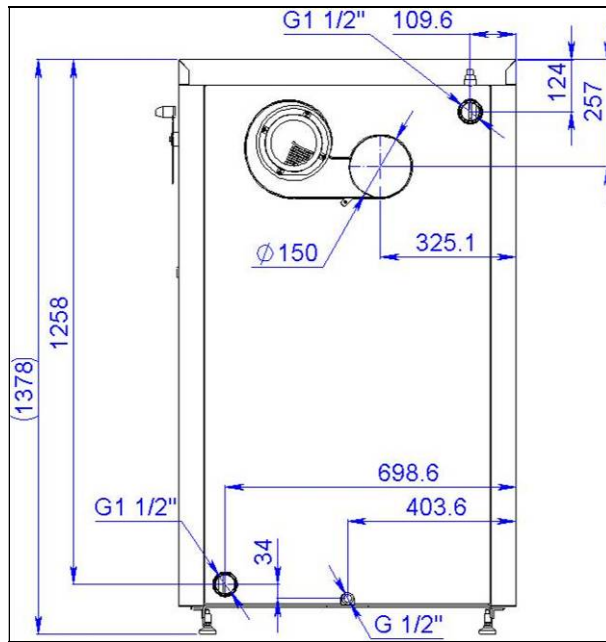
View to the input/output orifices of hot-water pellet boiler "Pelletherm 60 V.2 M03 and boiler Pelletherm 80 V.2 M03".
